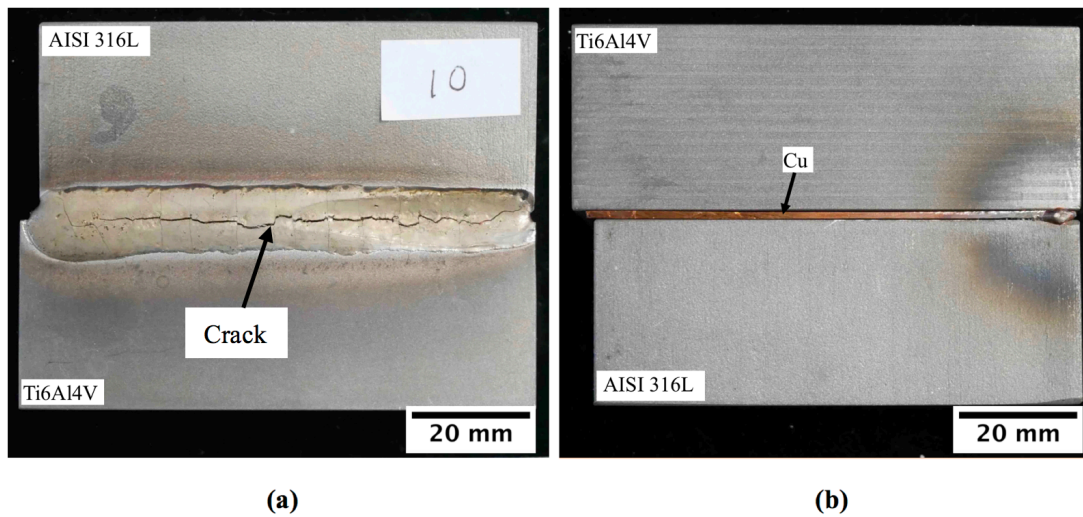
Dissimilar weld 10 (a) weld surface (b) weld root.
